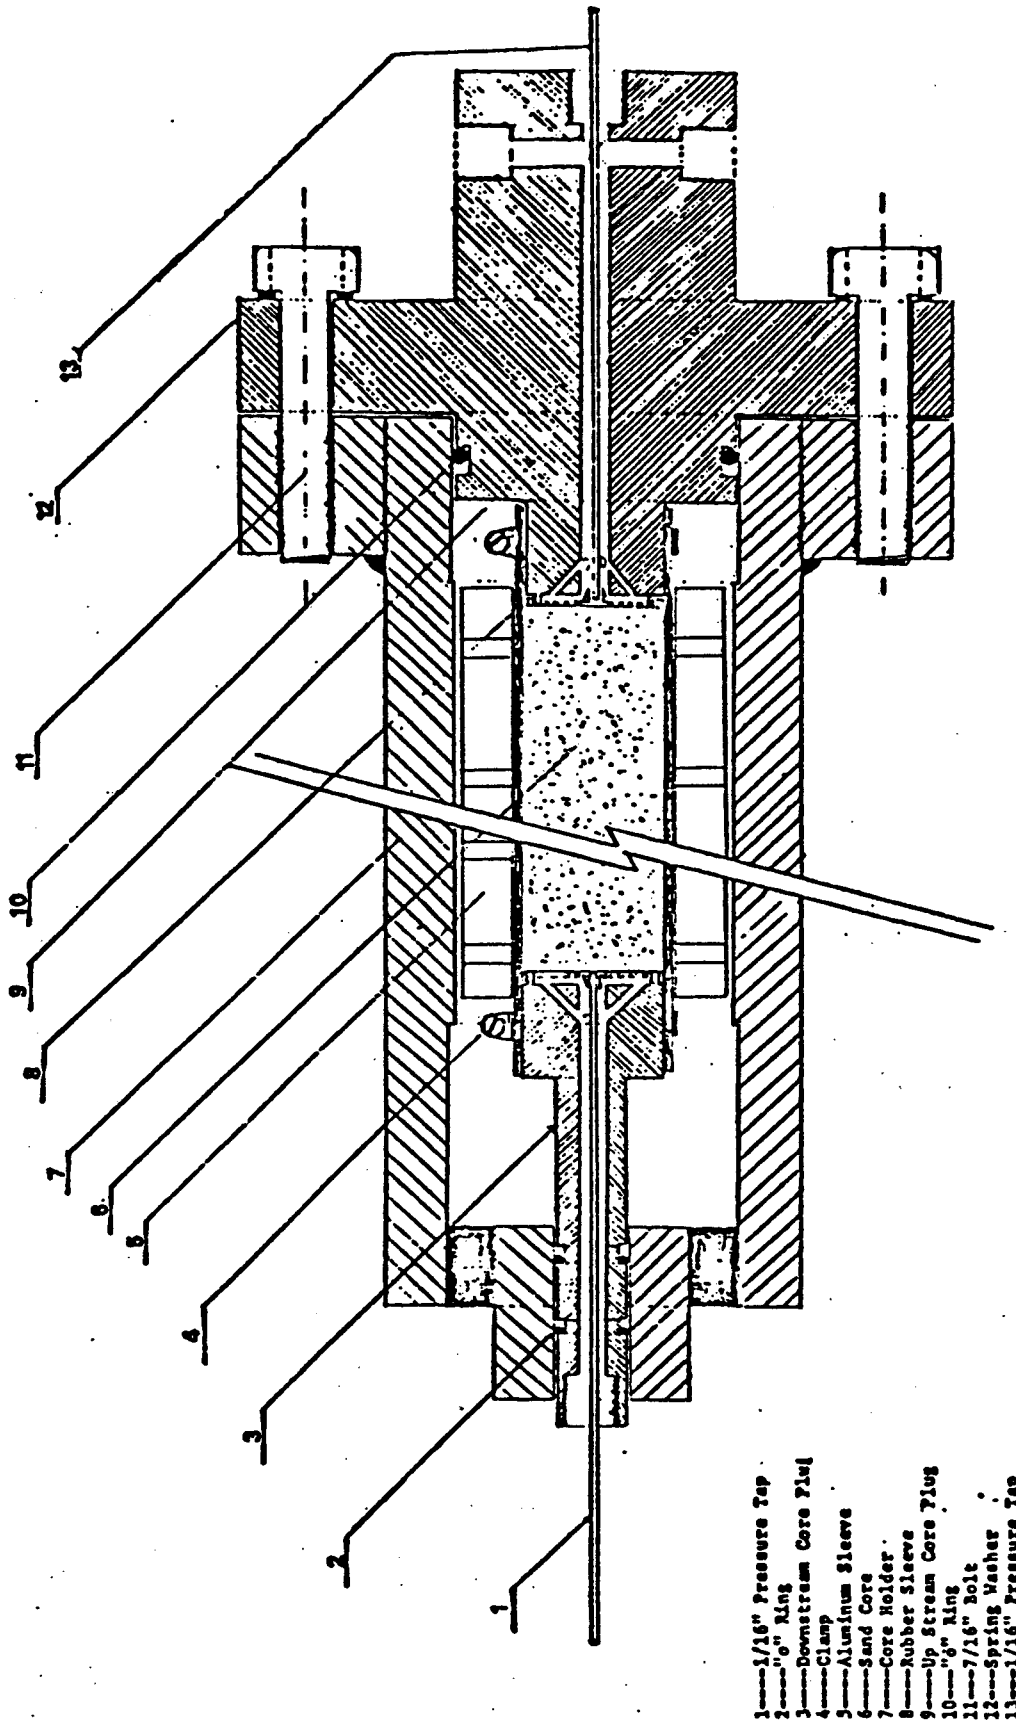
Schematic of the Assembled Core Holder, from Sageev (ref. 7)
